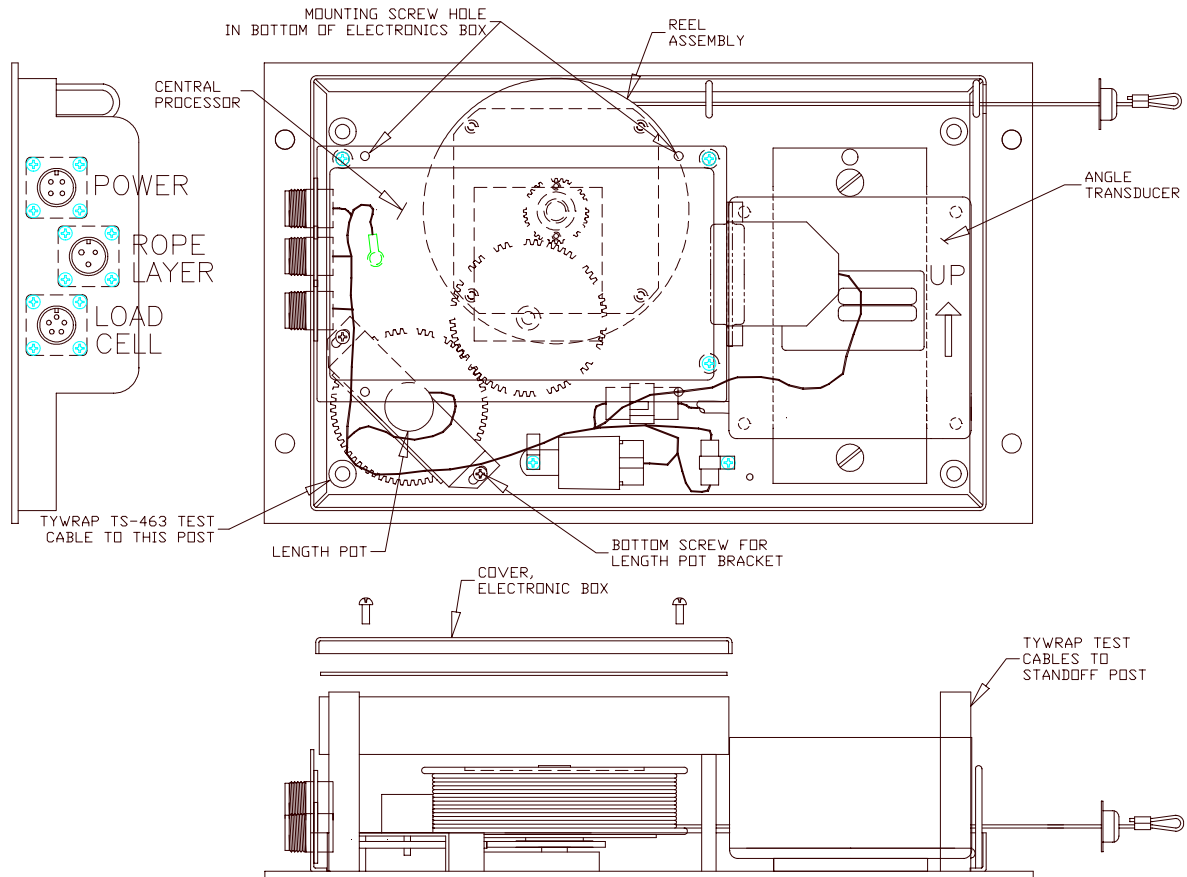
OSS-463E COMPONENT ASSEMBLY (A10)
